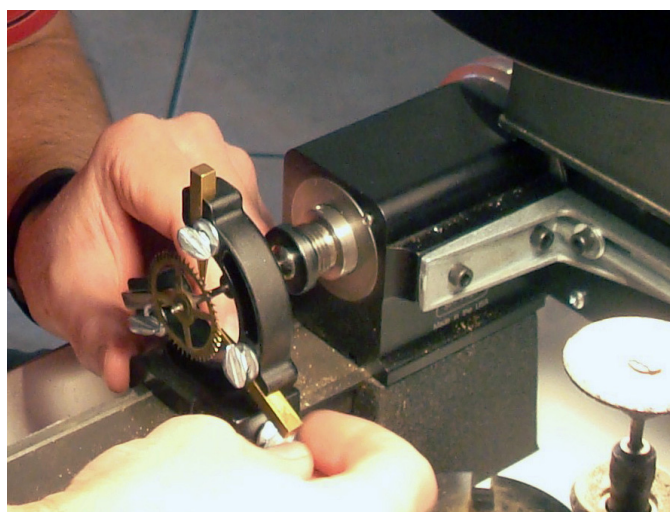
This photo shows the modified steady rest holding a gear. The Allen screws have been replaced with hand nut screws.
